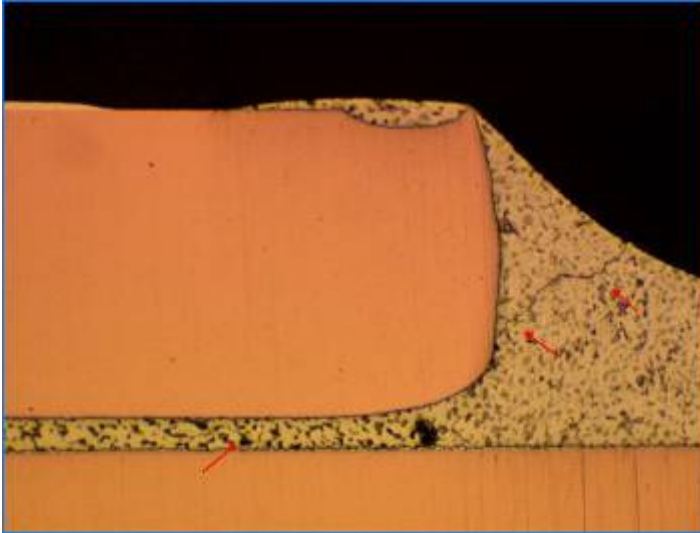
cross section, SN67, U54, right lead solder partial crack, 200xa
